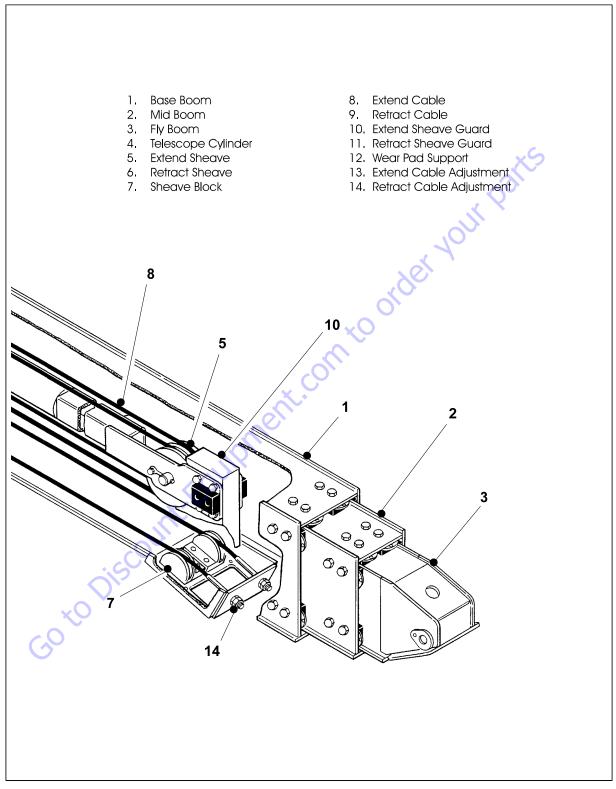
Boom Assembly Cutaway - Sheet 2 of 3
